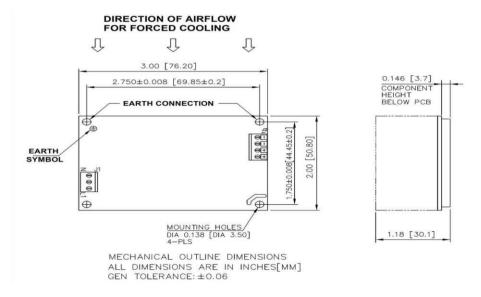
Mechanical Drawing - Screw Terminal (Option 1)
